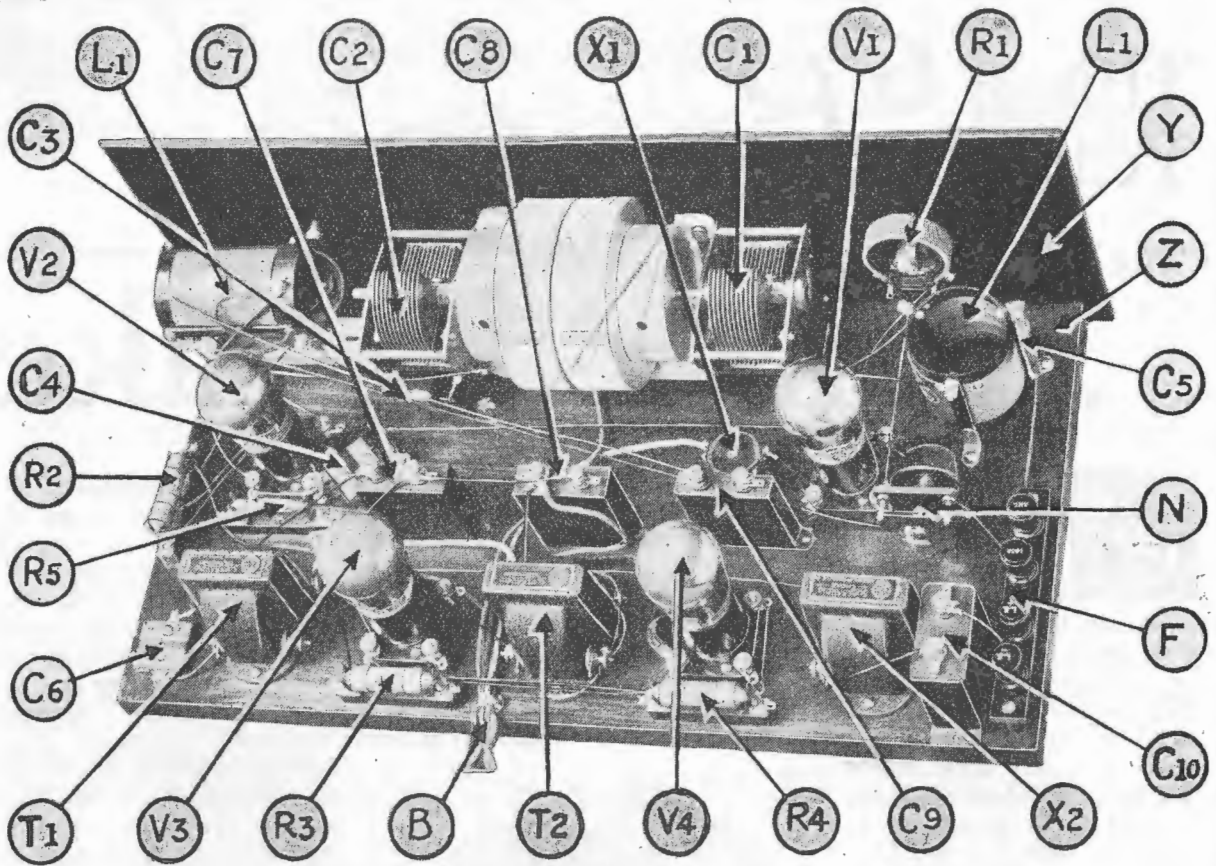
Every part can be clearly seen in this photograph. The fixed condenser C3 is supported by the wiring.
